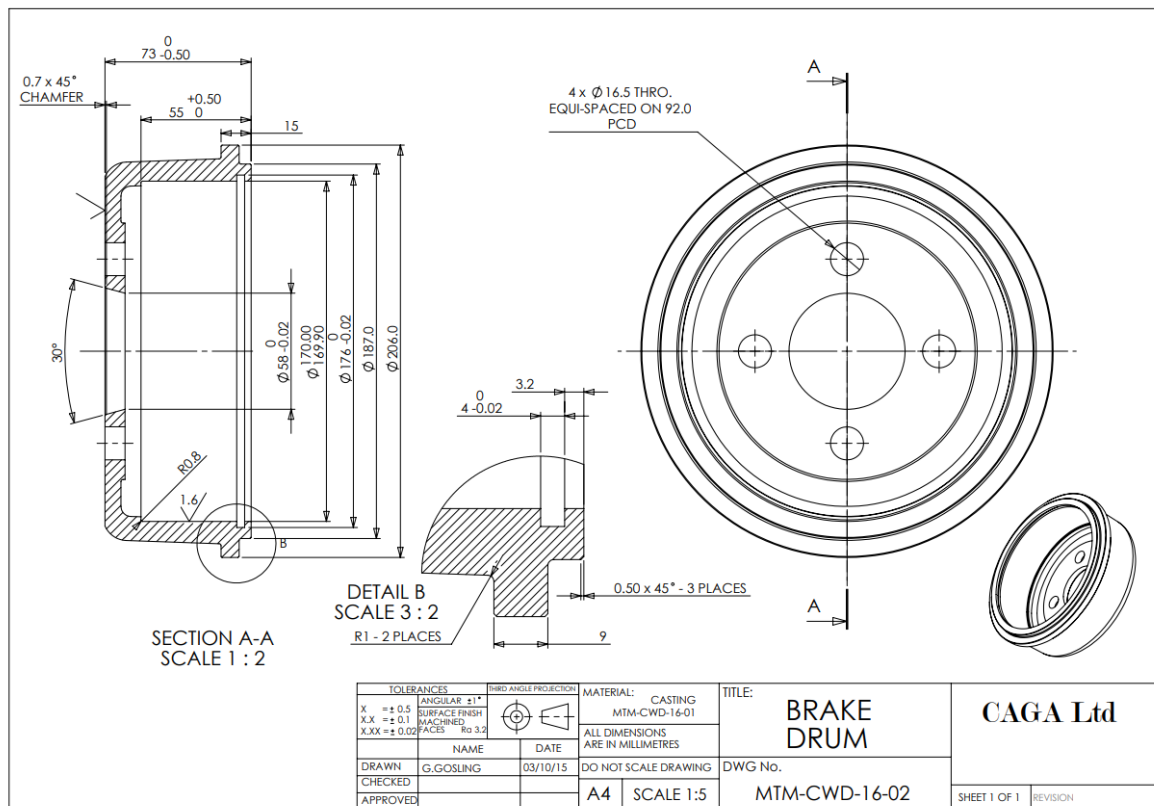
Technical Drawing of the finished Brake Drum after manufacture
